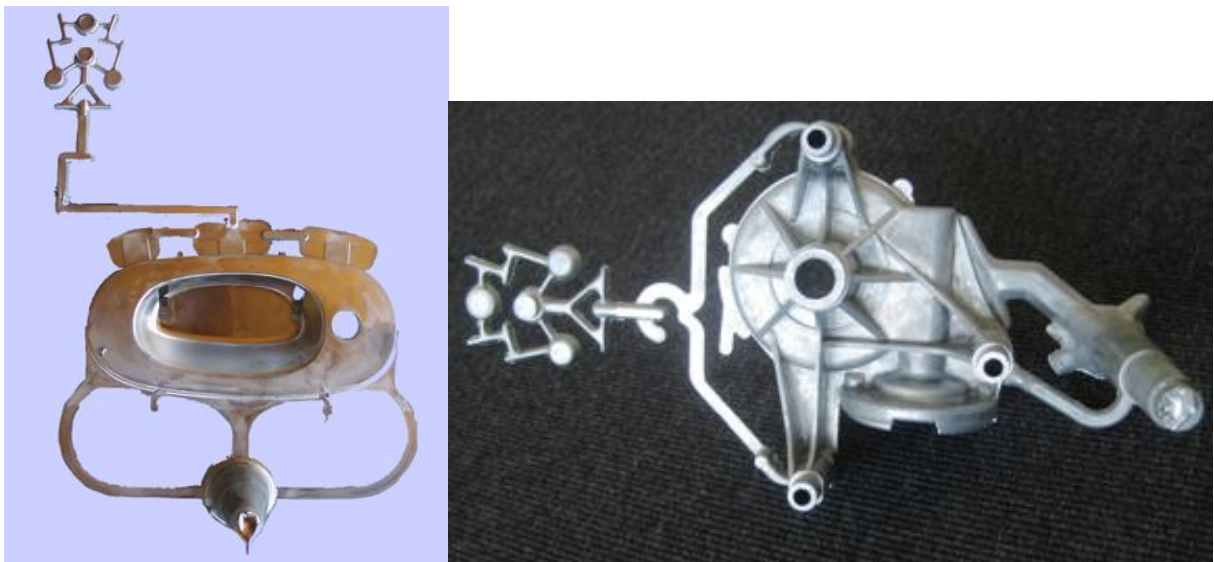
Two examples of Zinc alloy components produced by vacuum high pressure die casting (Courtesy of Fondarex) [79].
